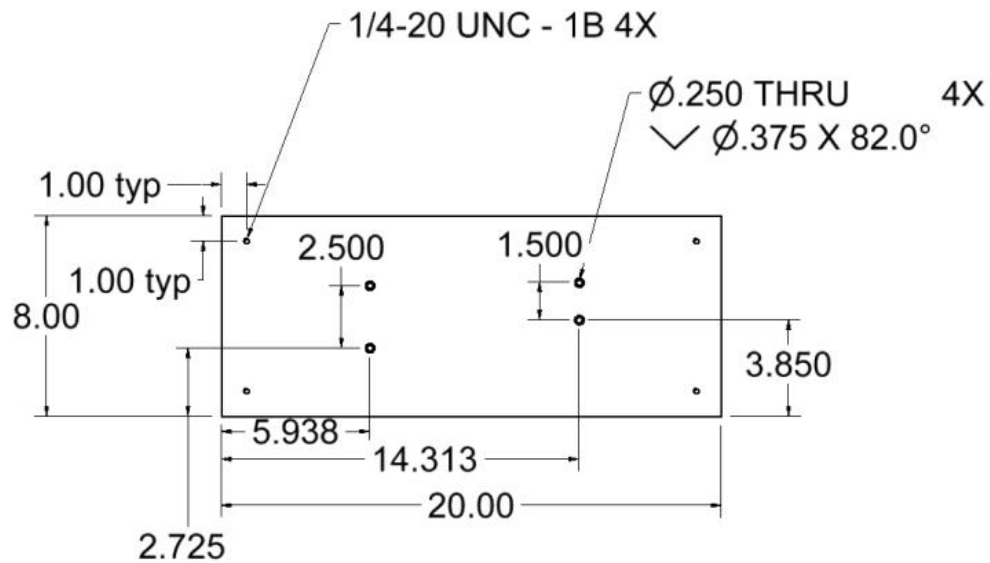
Mechanical drawing of support base (Support Stand Item1)
